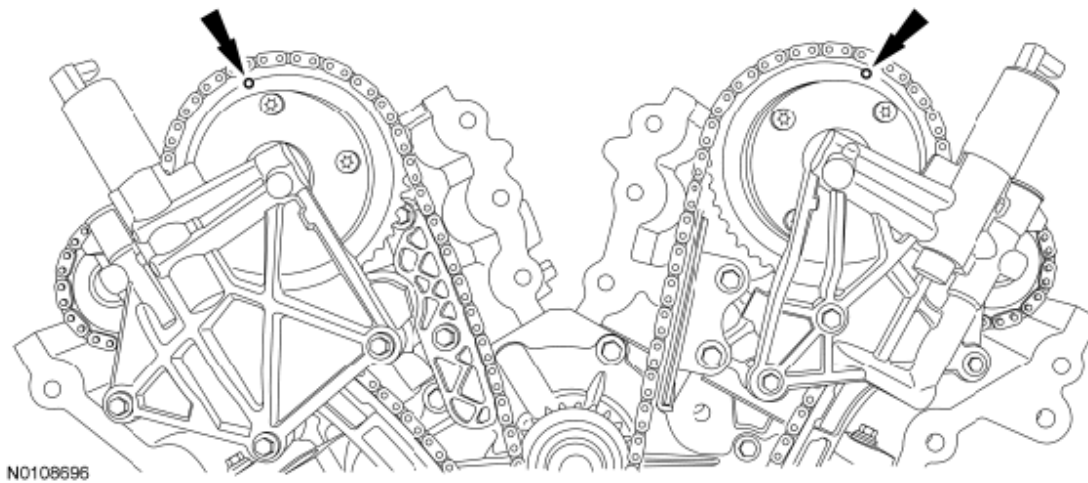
Locating Timing Marks On Variable Camshaft Timing (VCT) Assemblies
